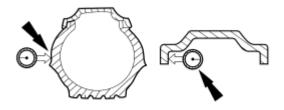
Locating Nut, Bolt & Engine Mount Brace Courtesy of FORD MOTOR CO.
